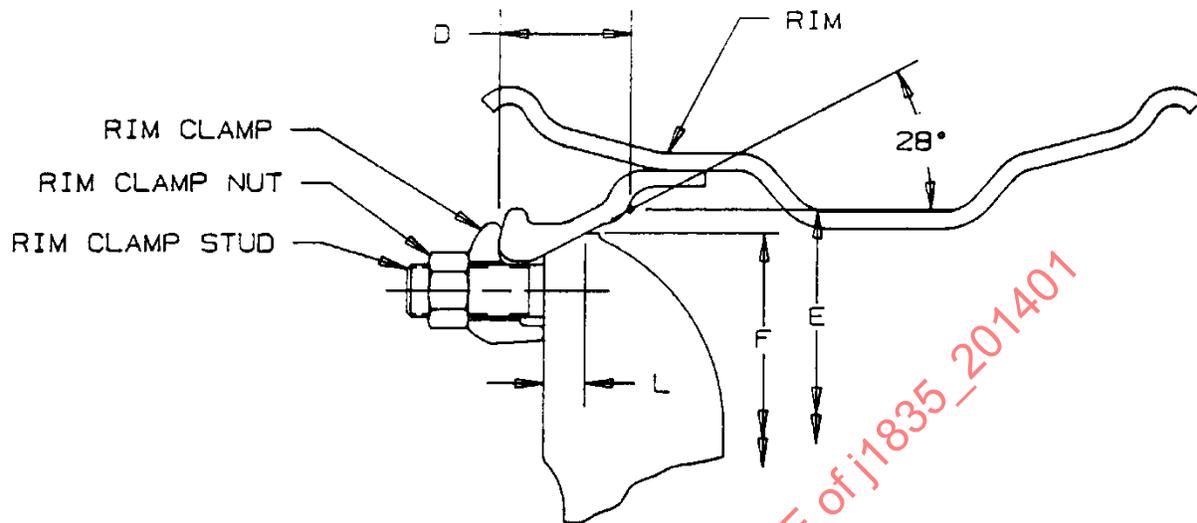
SINGLE ASSEMBLY, DROP CENTER RIM SHOWN
